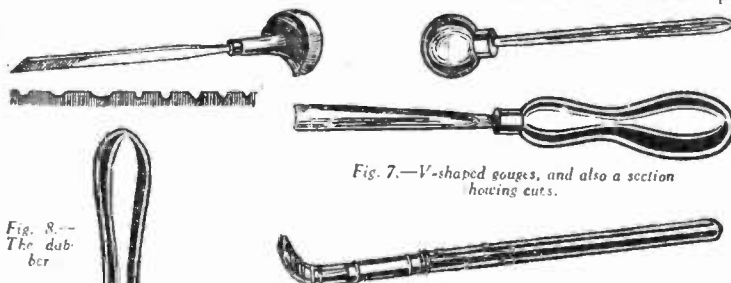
V-shaped gouges, and also a section showing cuts.
